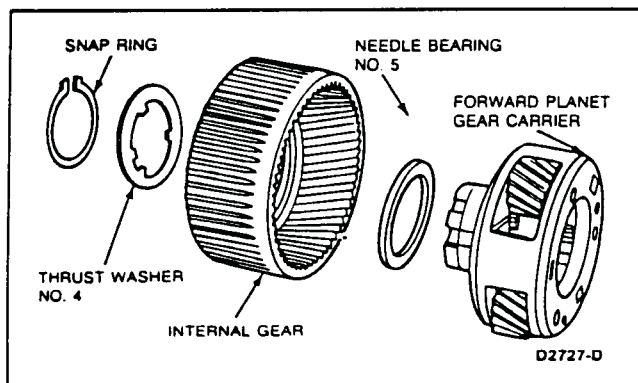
Separation of Planet Gear Carrier from Internal Gear
